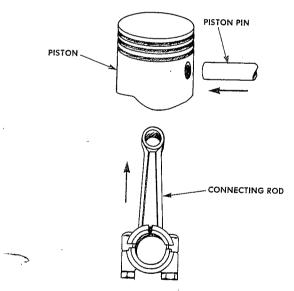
The connecting rod is attached to the piston by a pin so it can move.
